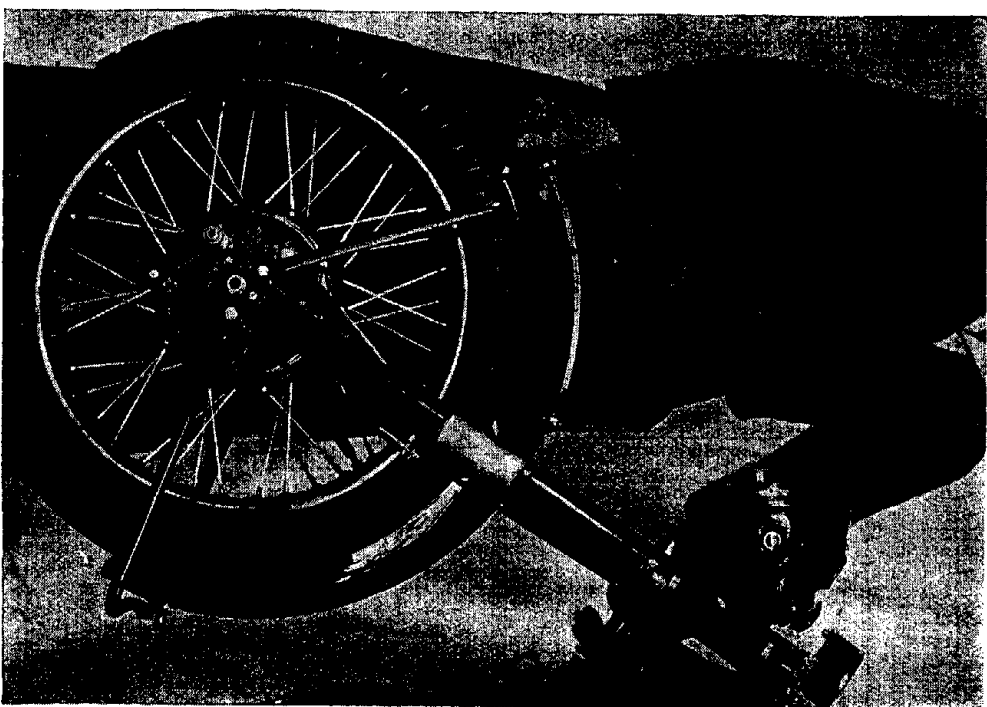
CHECKING STEERING-HEAD ADJUSTMENT.
